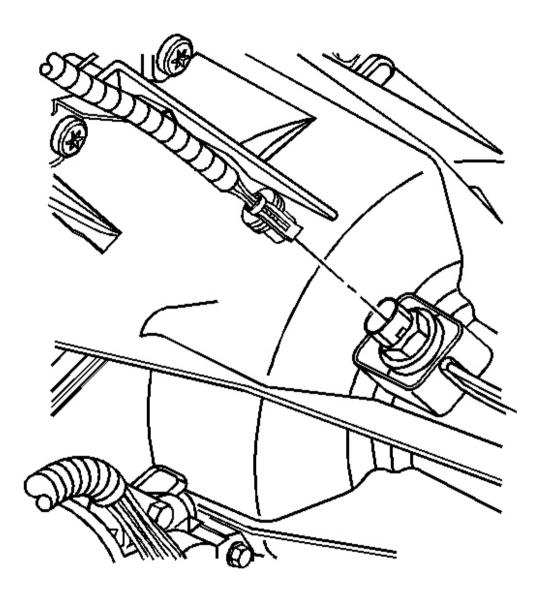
Electrical Connector & Speed Sensor Courtesy of GENERAL MOTORS CORP.
